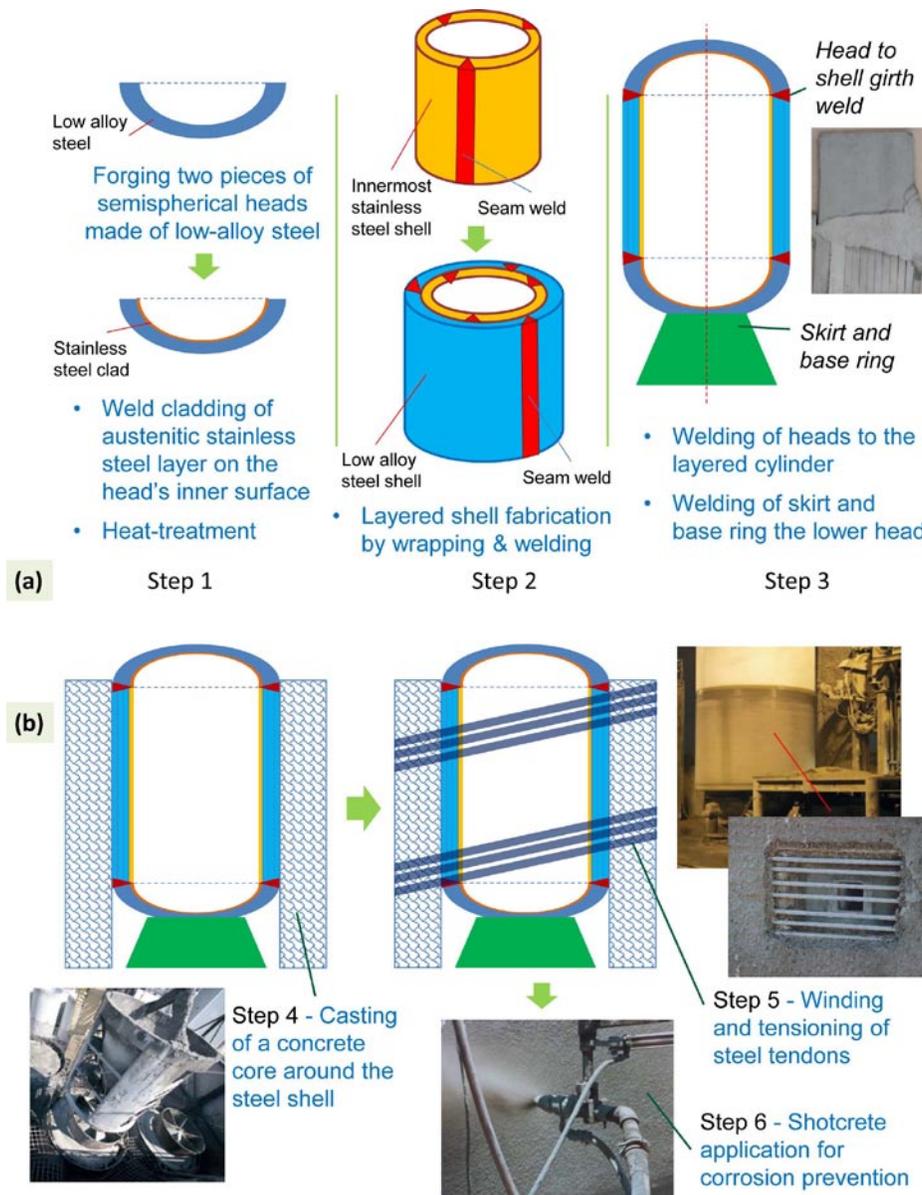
Schematics of manufacturing steps for (a) layered steel tank, and (b) pre-stressed concrete sleeve
